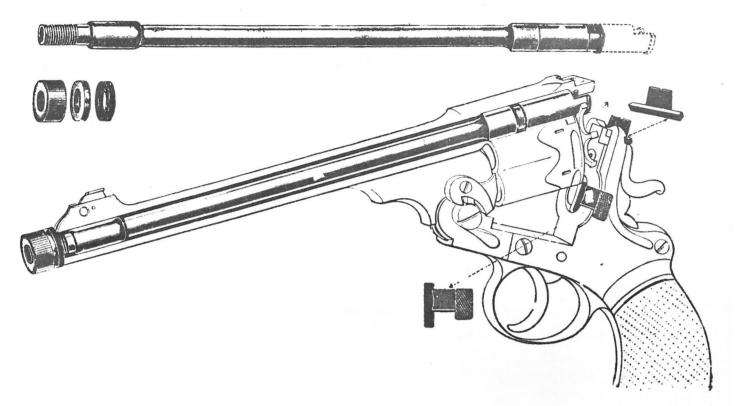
/.230 No. 5 Morris Tube single shot adaptor fitted to a .476 W.G. revolver
